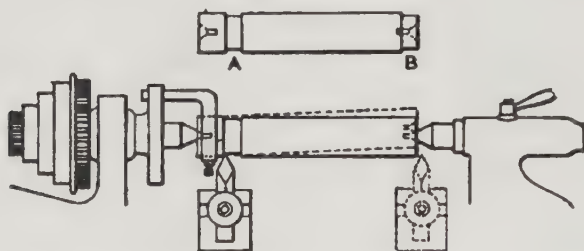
Testing for Alignment of Centers. Dotted lines show piece as held off center while moving the tool over for the second cut.
